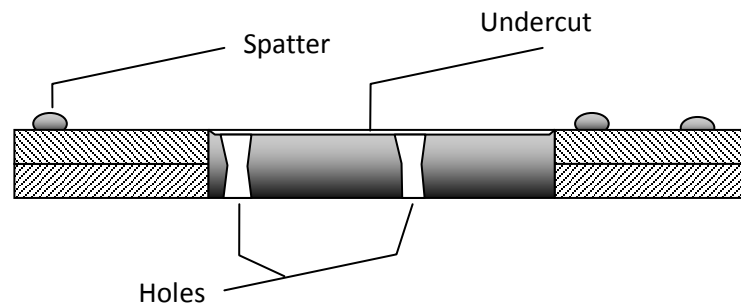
a. Schematic: Longitudinal weld section showing holes and spatter
